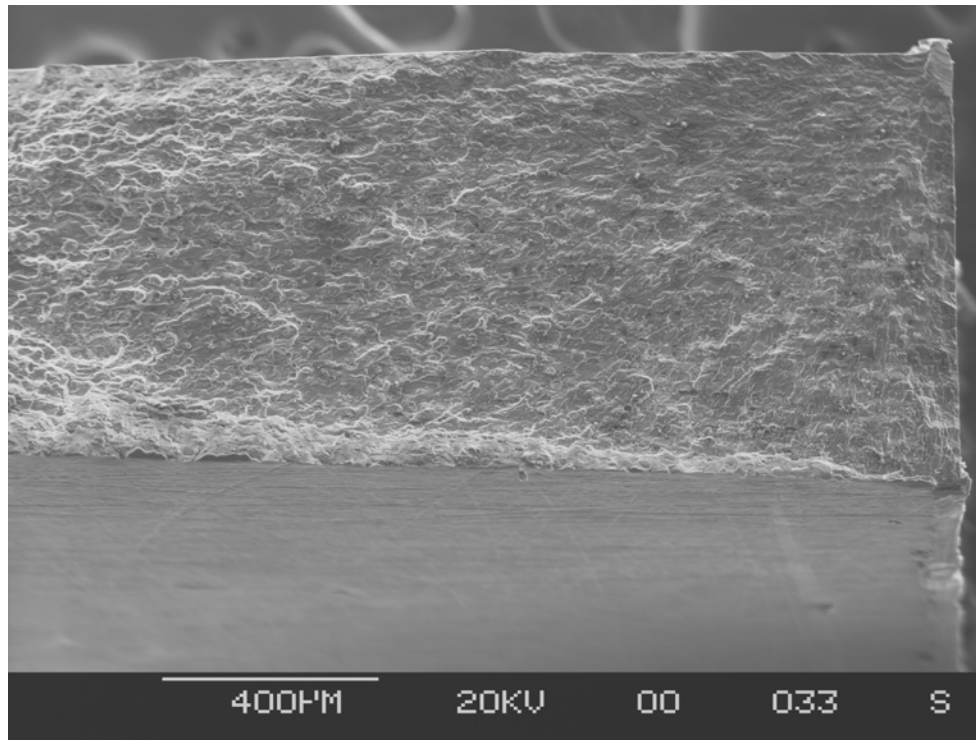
Fatigue Crack on Fracture Surface of Specimen N4.
